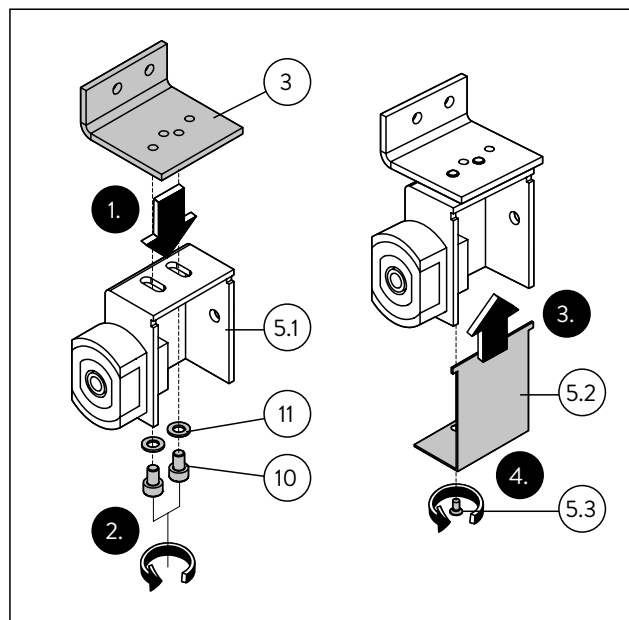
Connecting the hold-open magnet with the hold-open magnet bracket
